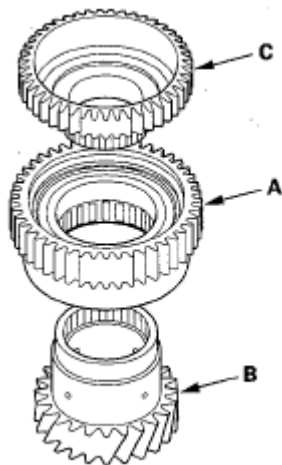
Identifying 1st Clutch Hub, 1st Gear And 1st-Hold Clutch Hub
